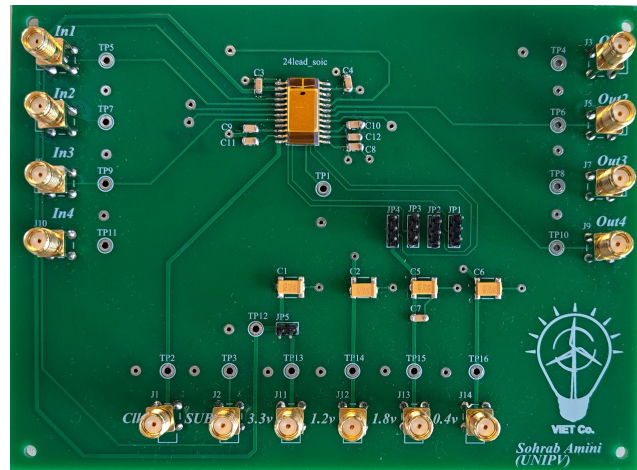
Photograph of the custom two-layer PCB designed for ASIC testing.
